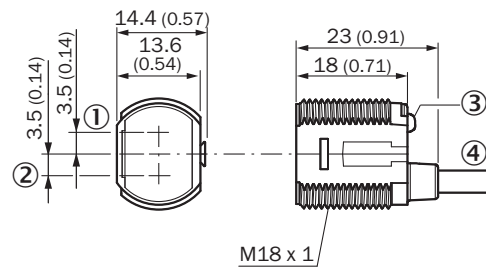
ZLx18-6xxxxx / ZLx18-Fxxxxx, cable
